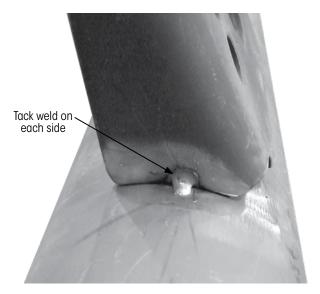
Tack weld brake chamber bracket to axle tube
